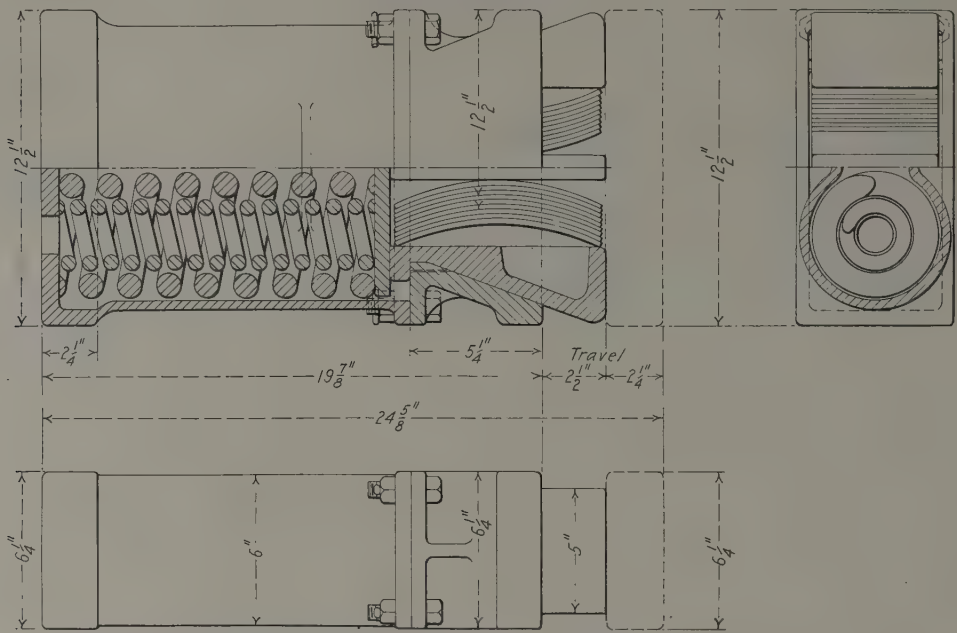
Passenger Friction Draft Gear for 6½-in. Coupler Yoke. Gould Coupler Company.
